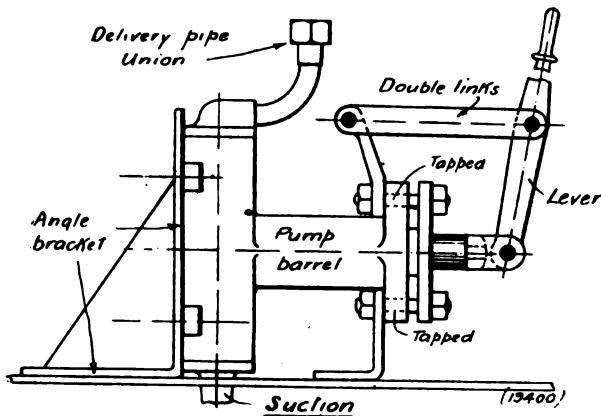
SUGGESTED GENERAL ARRANGEMENT OF PUMP.
